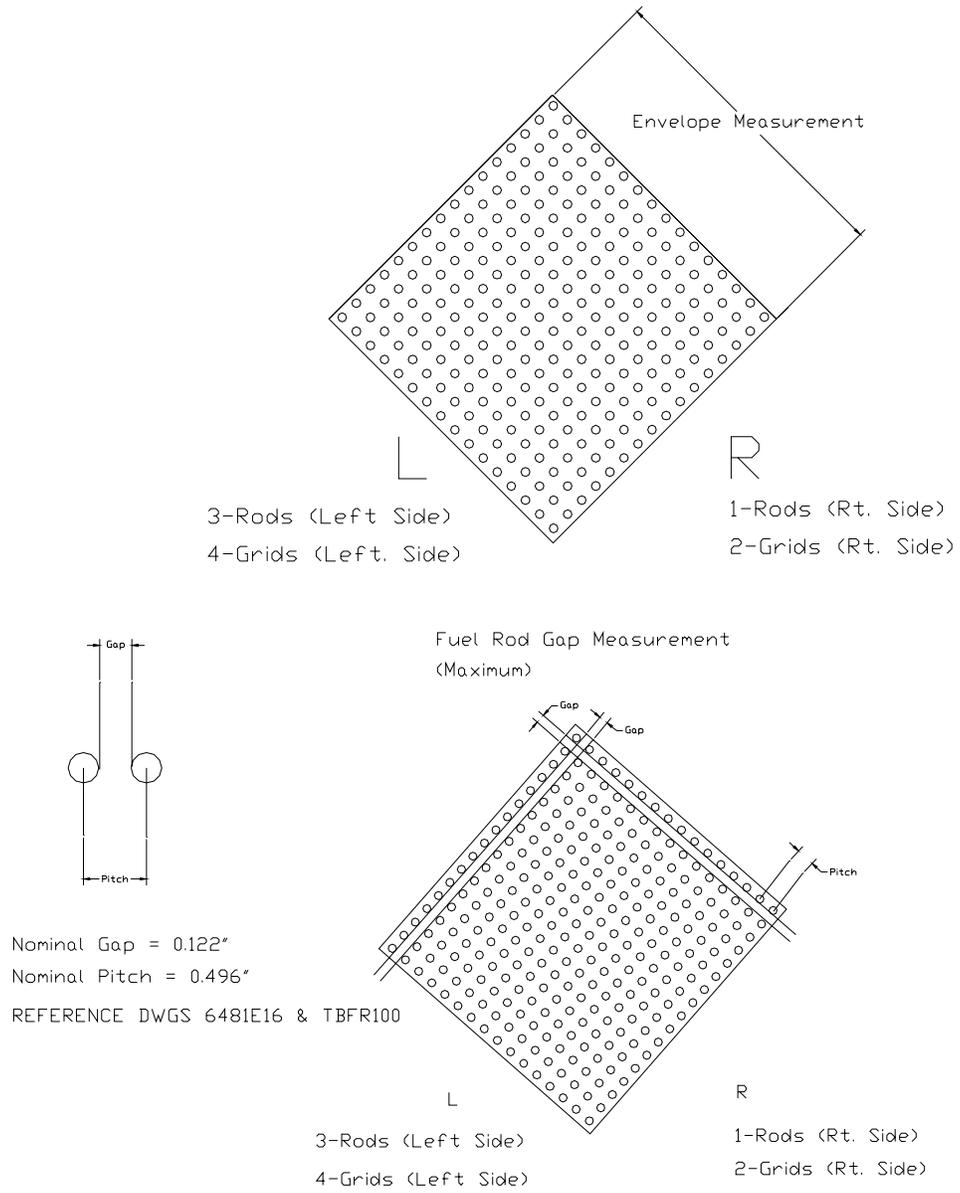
Measurements Made on QTV Fuel Assemblies Before and After Drop Tests
